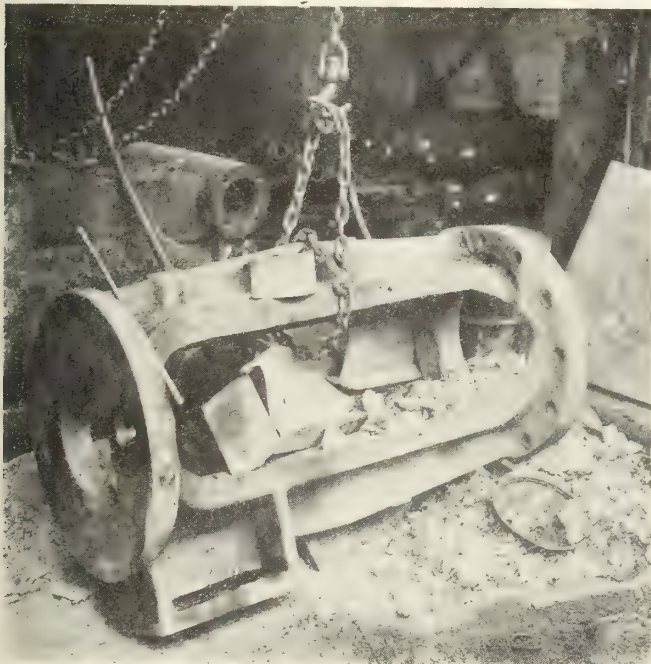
CROSS-HEAD SLIDE OF HYDRAULIC PUMP WHICH WAS CRACKED THROUGH AT ONE END.
